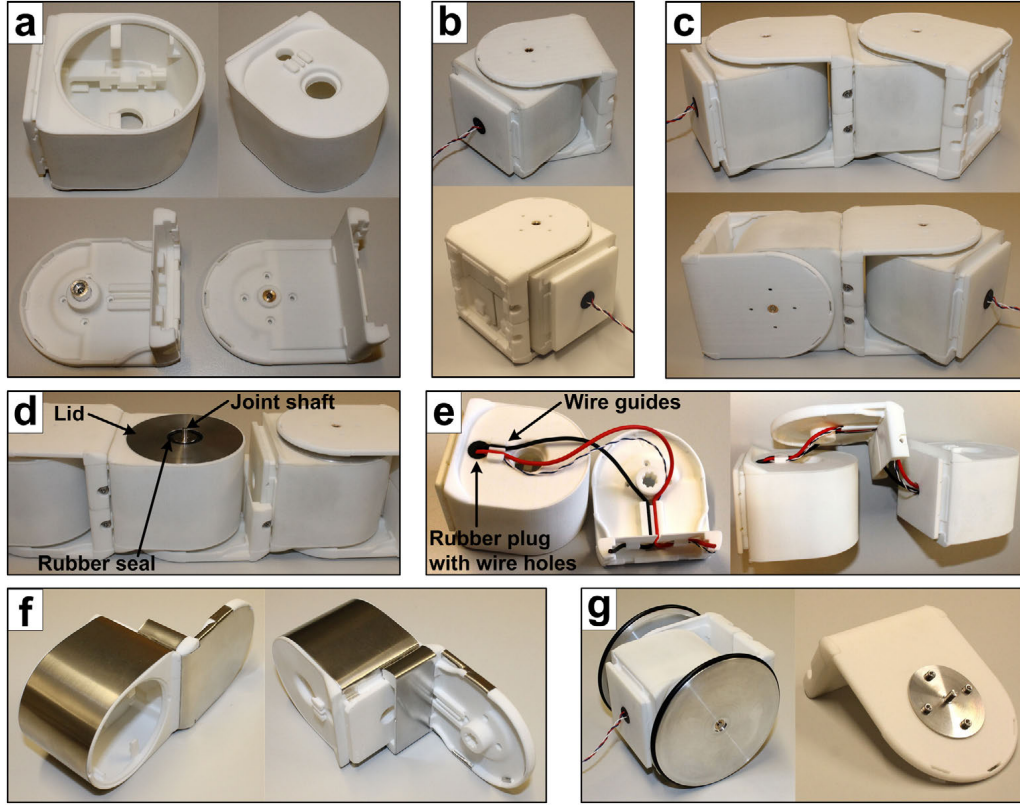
(a) The 3D printed parts of the joint module. (b) A fully assembled joint module. (c) Two joint modules connected with parallel and orthogonal joint axes, respectively. (d) The inspection lid of the module. (e) The path of the electrical wires. (f) The module can be protected by replaceable metallic shells. (g) Passive wheels can be mounted on each side of the module.
